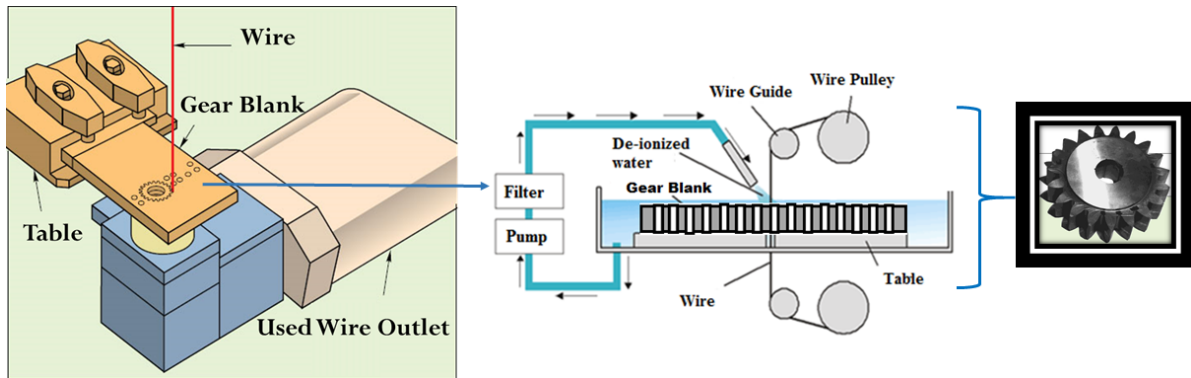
Schematic representation of wire electric-discharge machining of a gear.
